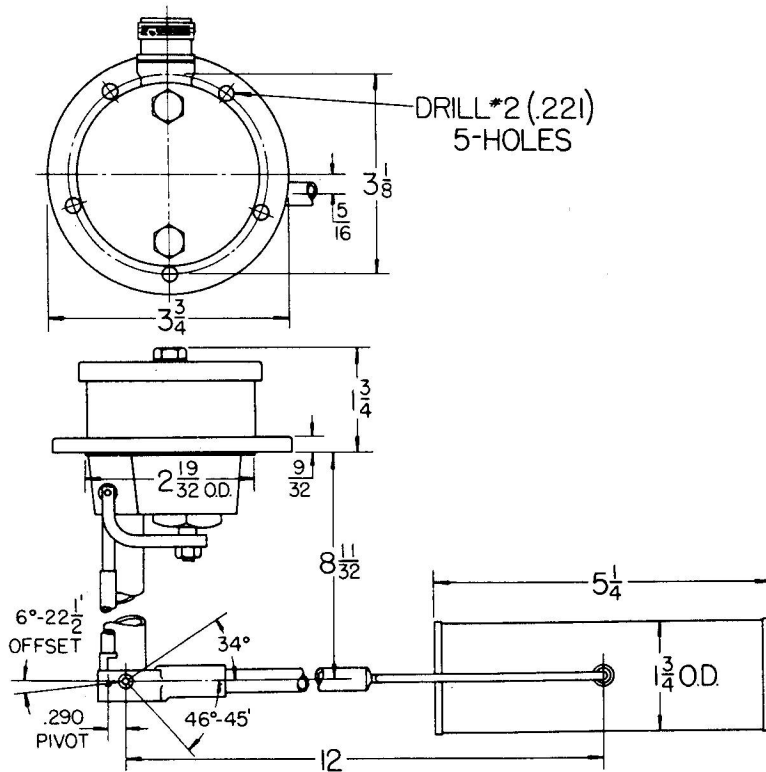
(Sheet 1 of 4 Sheets). General Dimensions
